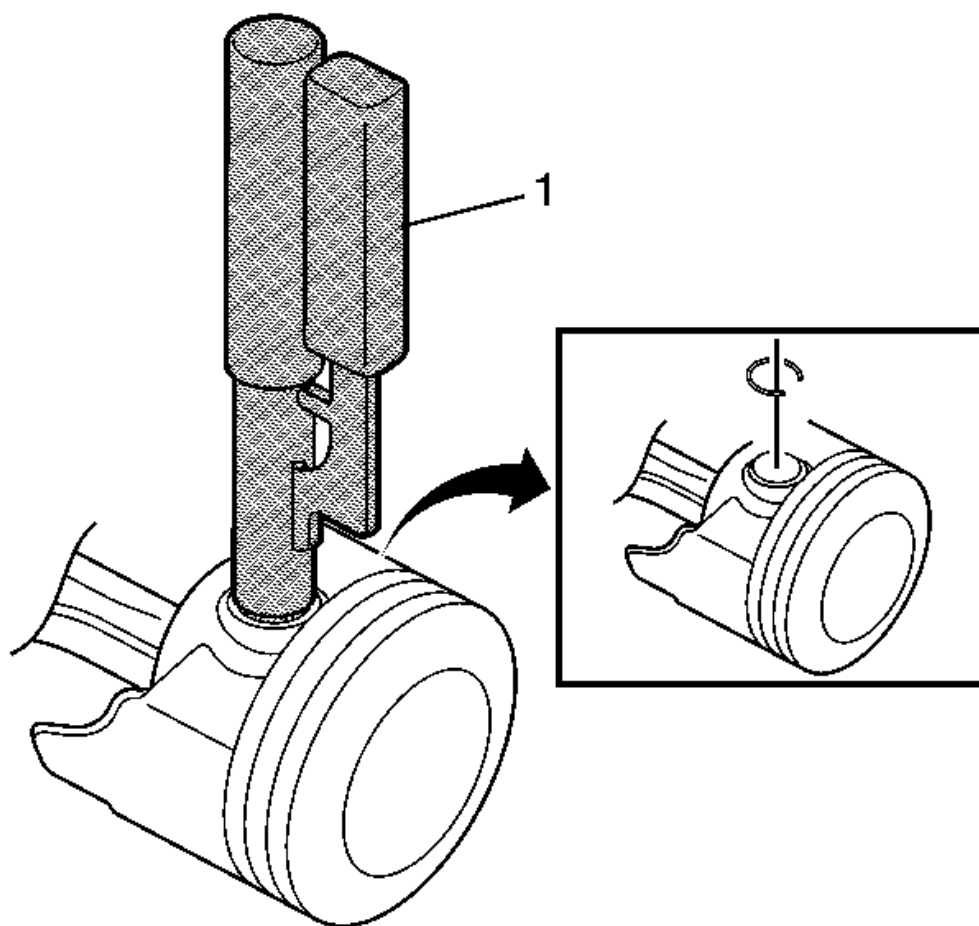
Remove Piston Pin Retainers Using EN-46745 Remover
